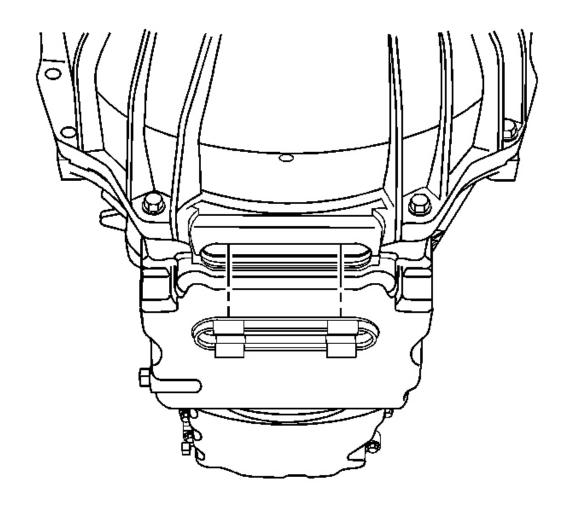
View Of Service Slot Plug Courtesy of GENERAL MOTORS CORP.
